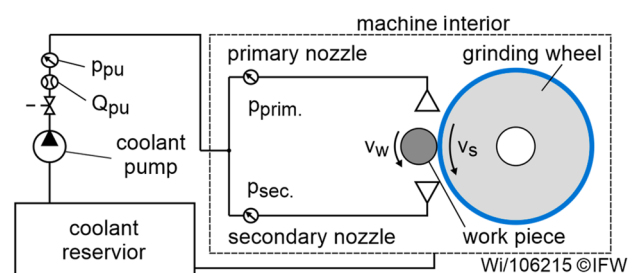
Coolant supply for the Schaudt CR41 machine tool
